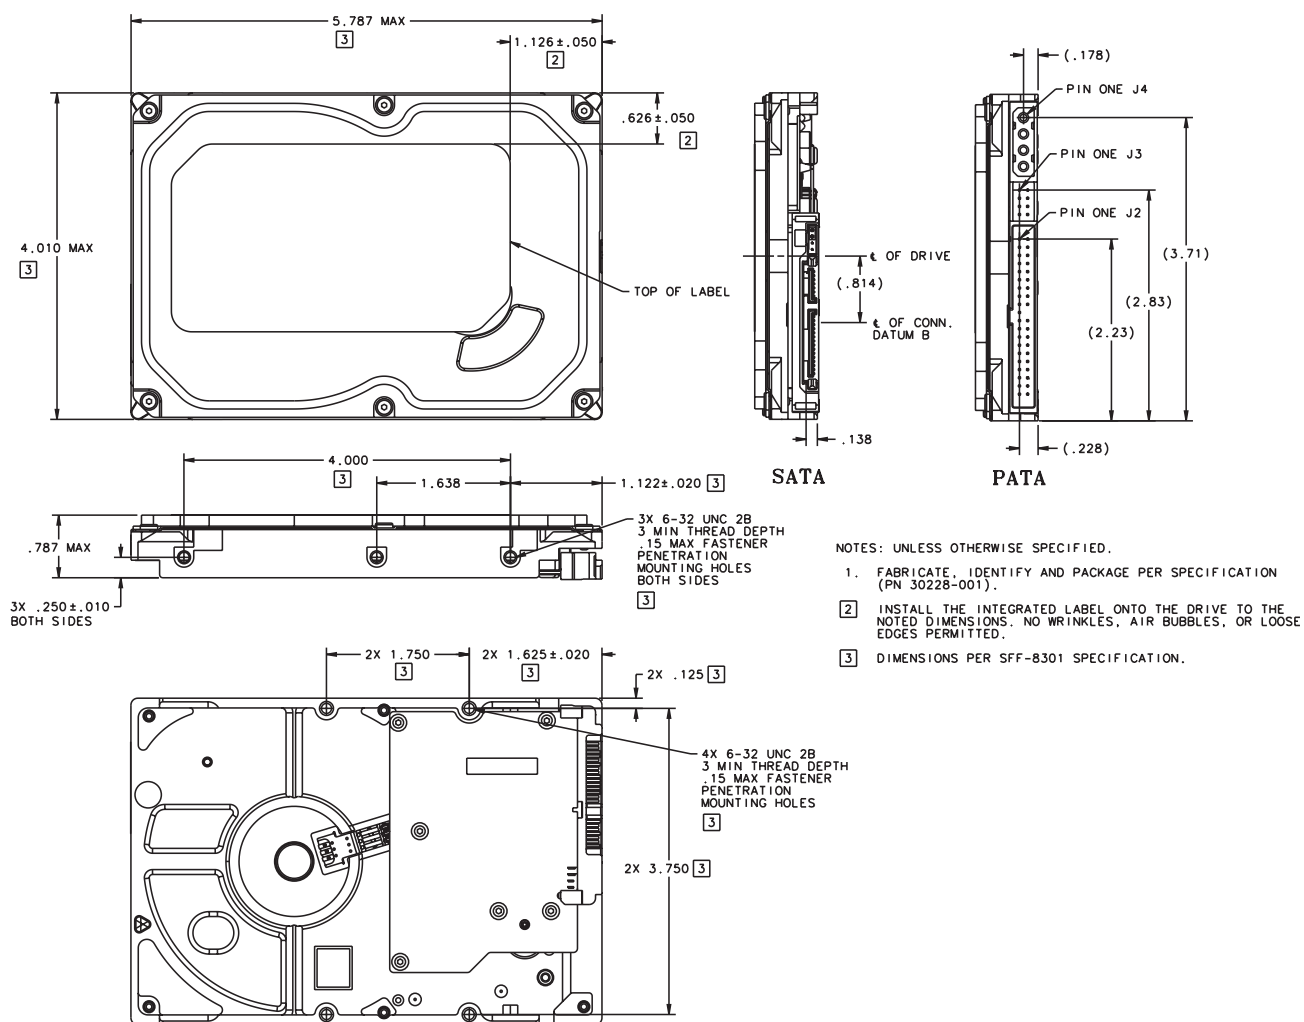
Mounting dimensions for 160-40 GB models (including ST3250410AS and ST3250310AS)
